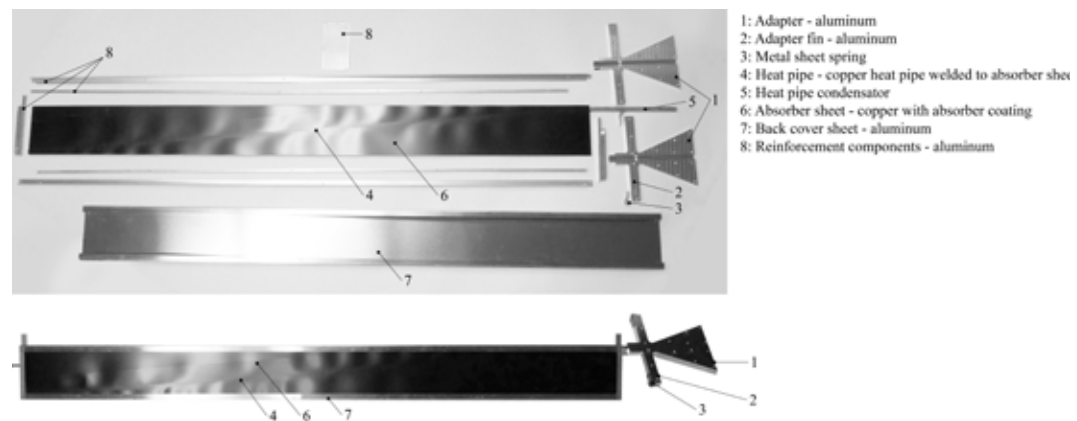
Slat components. Heat pipe laser welding is slightly visible on the absorber sheet © Fraunhofer ISE
